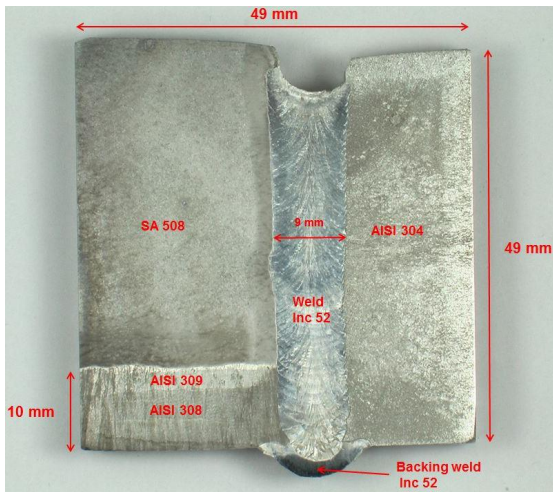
Cross-section of the NG-GTAW weld. It has been etched to reveal better the macrostructure: materials, weld passes in Inconel 52 weld metal and HAZ of SA508 and SS304.
